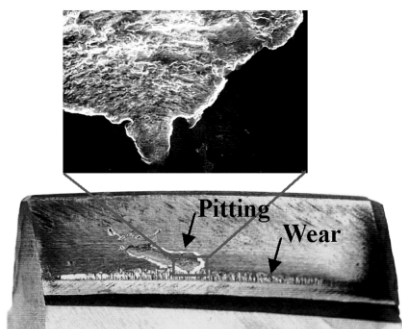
Example of wear and pitting failure of gear surface
